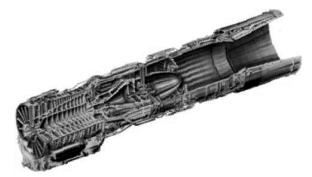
GE J93 Mach 3 turbojet engine (courtesy of GE).
